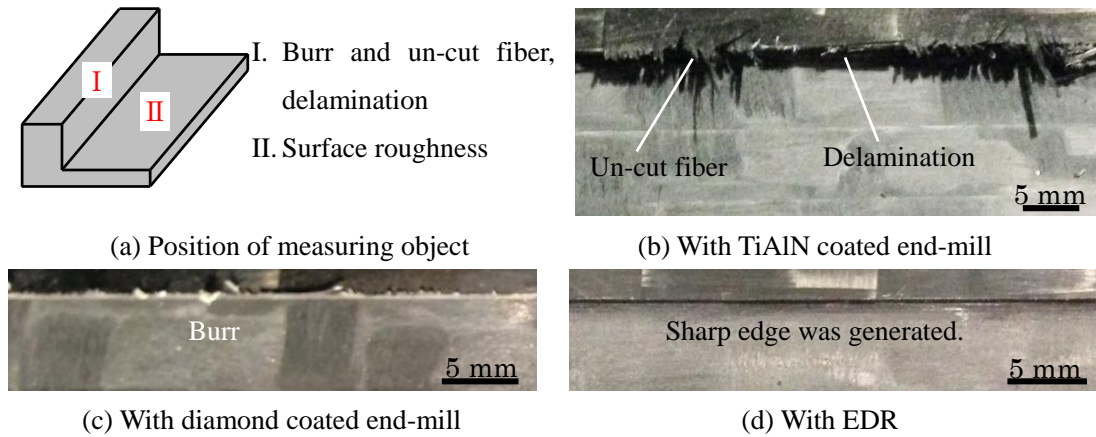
Photographs of finished surface after machining of  $L=1.6$  m
